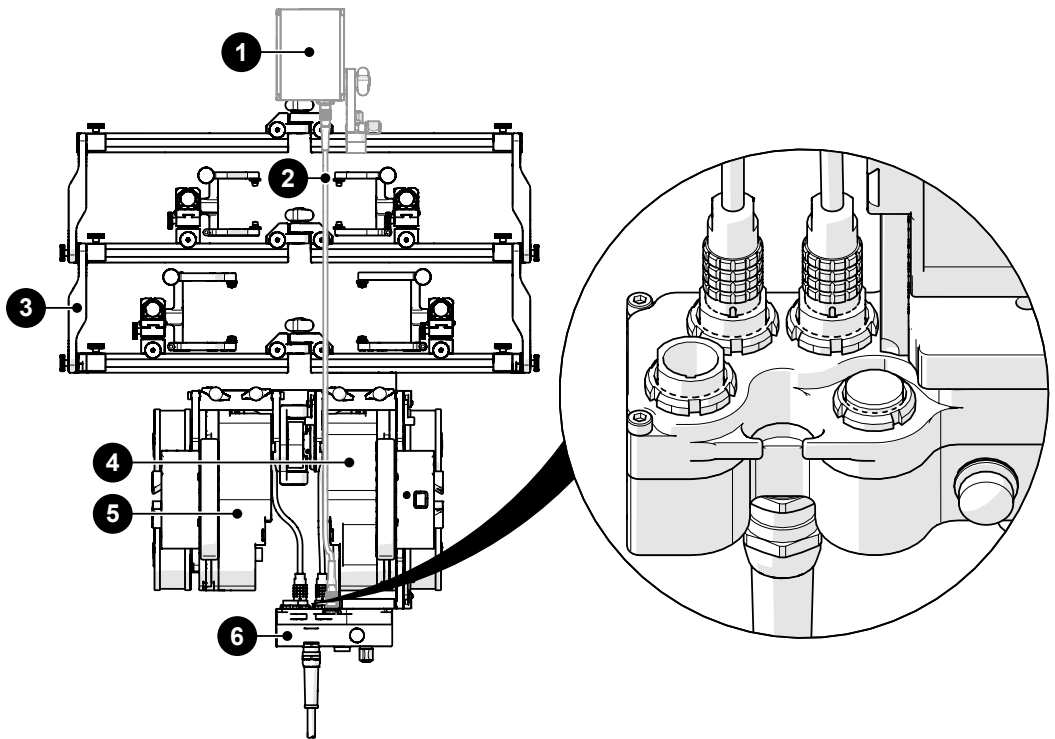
Standard crawler configuration with pivoting probe holder frame
